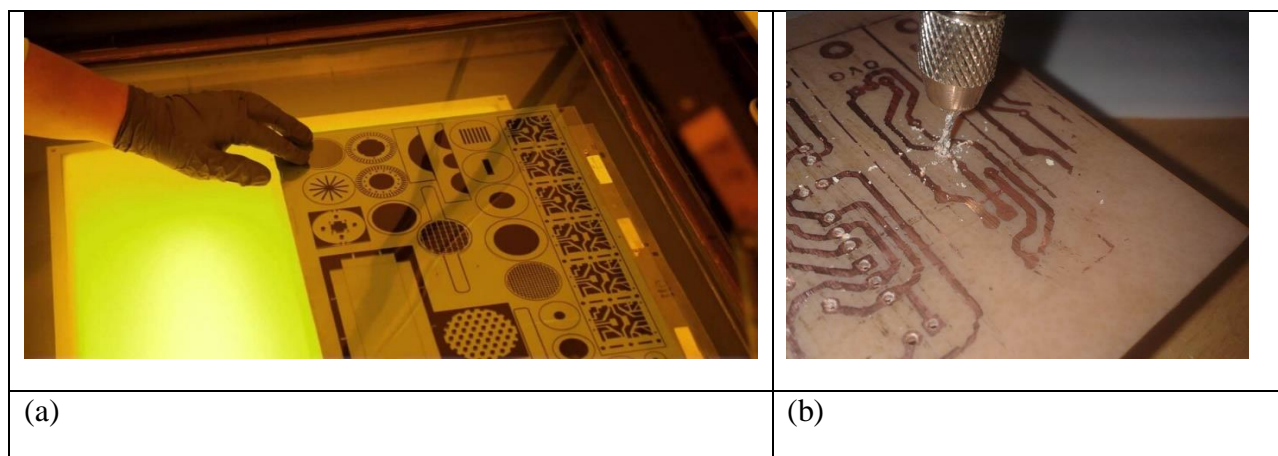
(a) Fabrication and (b) drilling process of PCB Board
